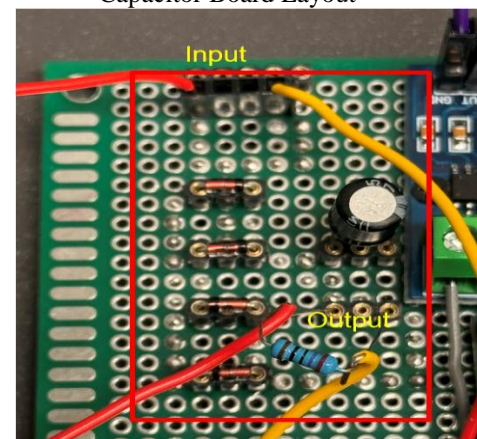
Full Wave Rectifier with Load Capacitor Soldering Board Layout
